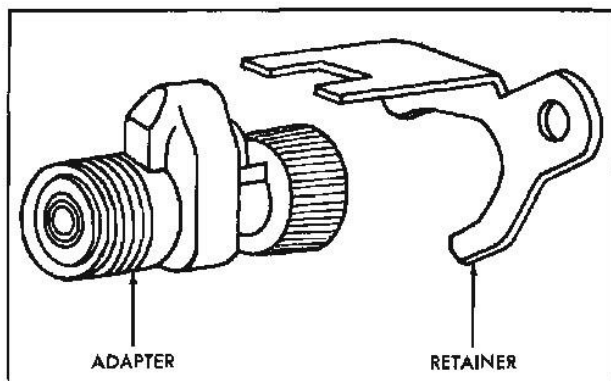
B-39 Speedometer Driven Gear Adapter and Retainer - Trailer Provision
